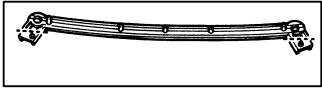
SEAL MODIFICATION FOR THE FRONT OF THE OIL SUMP, GM 6–250
